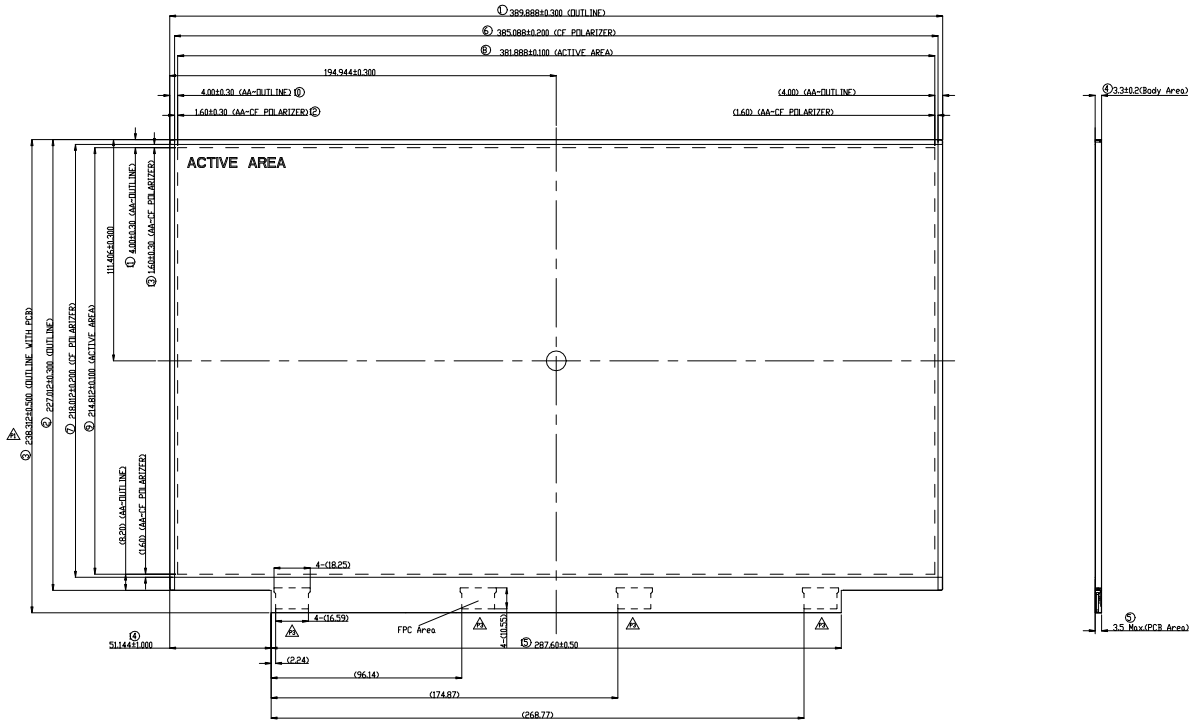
TFT-LCD Module Outline Dimension (Front View)
